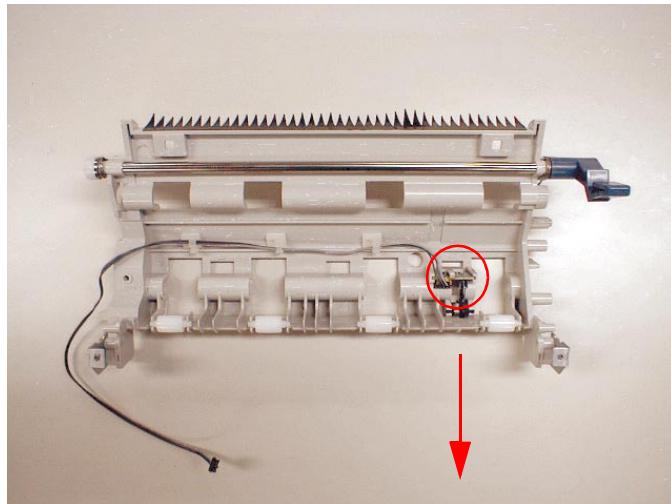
Removing Actuator and PE Board Assembly (1)
